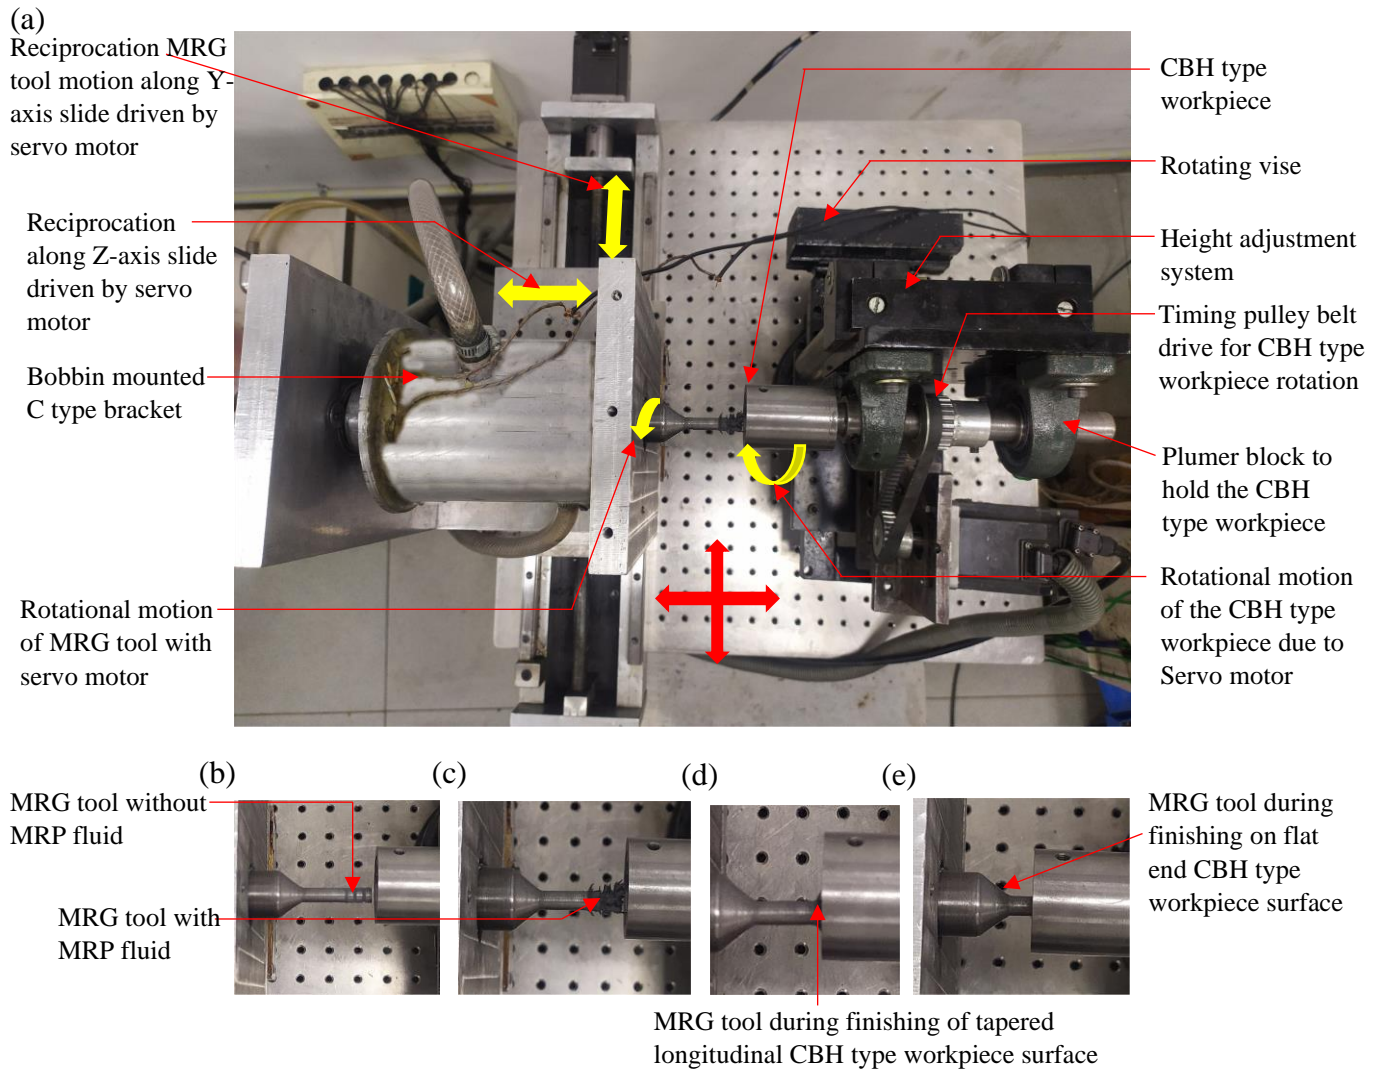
Photograph of (a) complete experimental setup of the grinding wheel type magnetorheological (MR) finishing (MRG) process, the tool (b) without MR polishing (MRP) fluid, (c) with stiff MRP fluid, and (d) during finishing of the tapered longitudinal and (e) during finishing of the flat end cylindrical blind hole (CBH) type work part surfaces.
